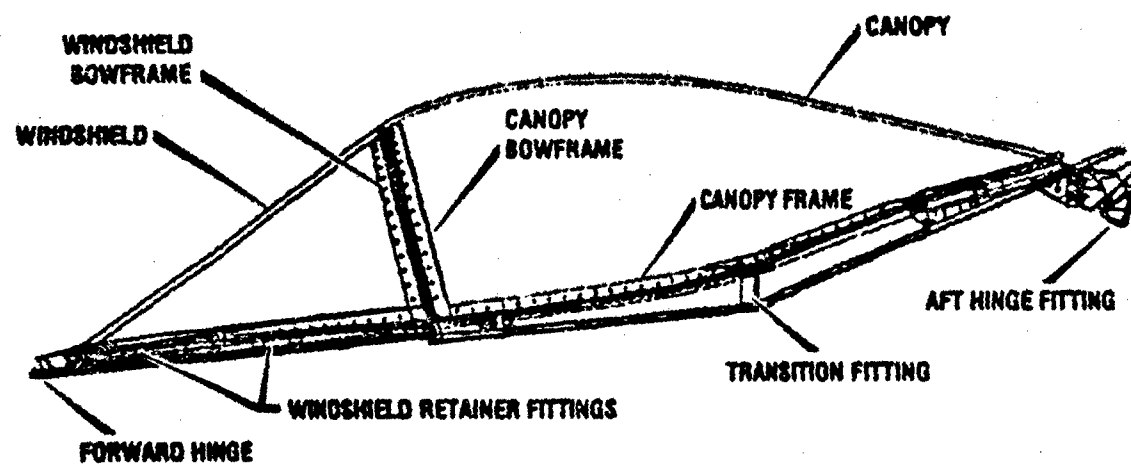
Ground Attack Windshield/Canopy Frame Assembly
